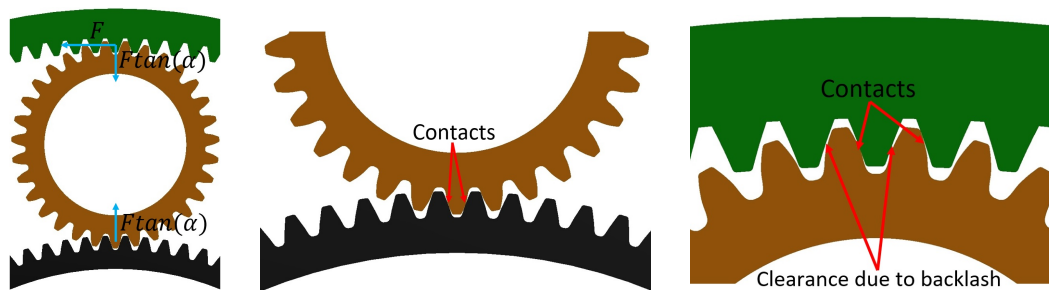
Left: plane gear forces due to meshing with ring gear and sun gear in the bearingless planetary gearbox. F is the tangential meshing force (corresponding to F_g or F_f) and α is the gear pressure angle. Middle: two sided contact between a planet gear and a sun gear. Right: clearance in the meshing between the ring gears and the sun gears due to gearing backlash.
